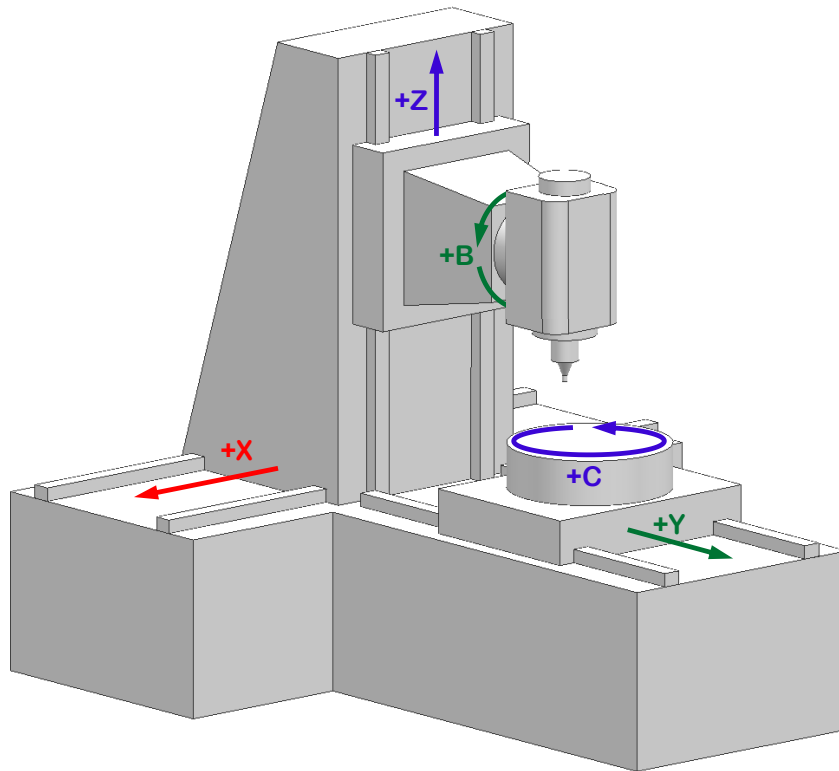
Standard axis arrangement of a five-axis machine tool.
